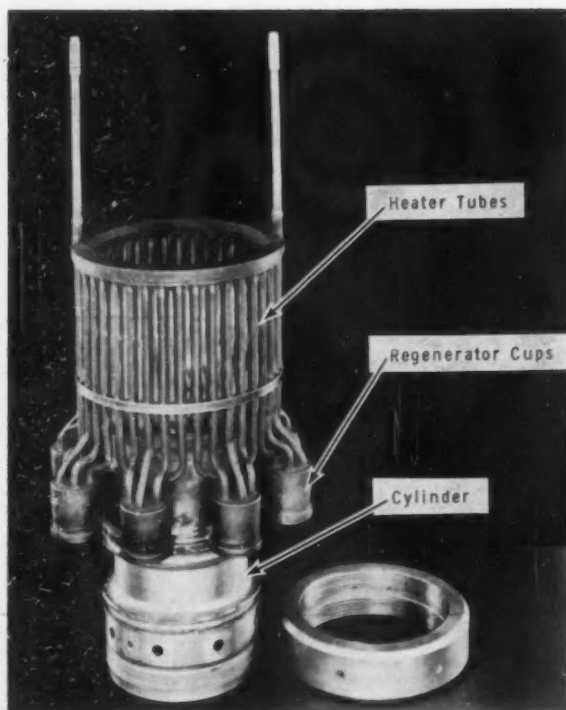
Heater tubes and main engine cylinder assembly to which they are brazed.
